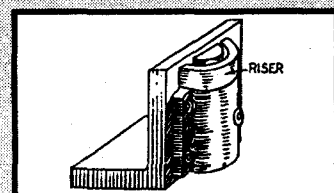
This is a typical arrangement that is used for babbitt bearings. It is absolutely necessary that both the fixture and the bearing be hot before the metal is poured. The height of the riser is determined by the size of the bearing. It is placed there for the purpose of insulating the metal in the
